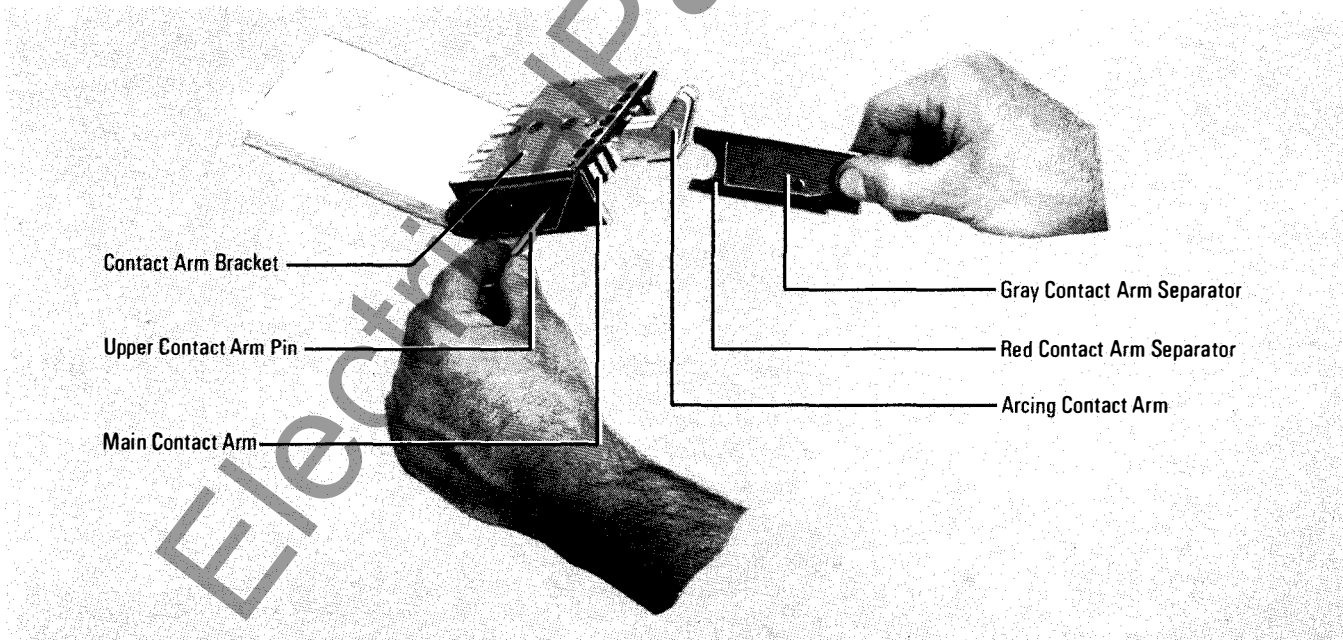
Removal of Upper Contact Arm Pin and Contact Arm Separator.
